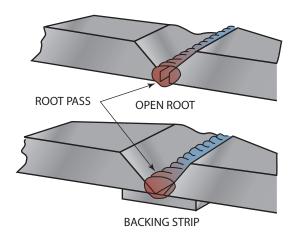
Root pass maximum deposit 1/4 in. (6 mm) thick.
